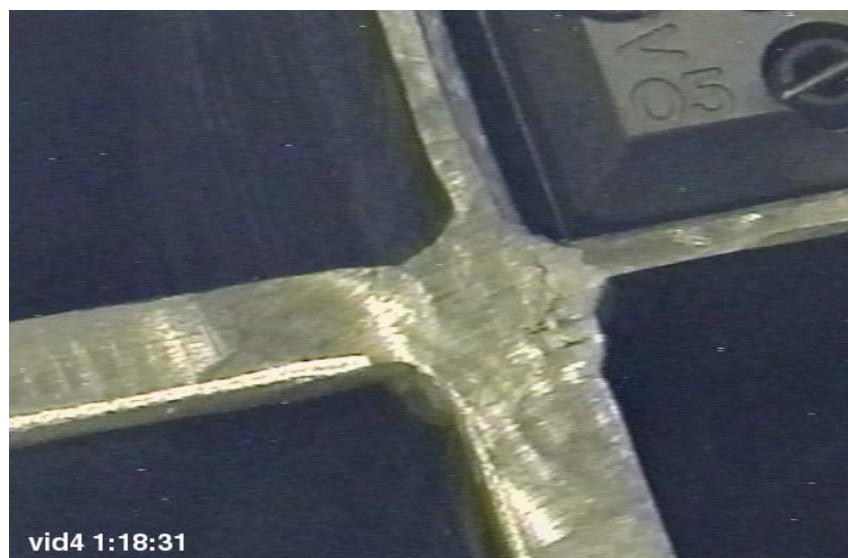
Existing 1985 weld crack at location No. 6 identified in Figure G-9.
